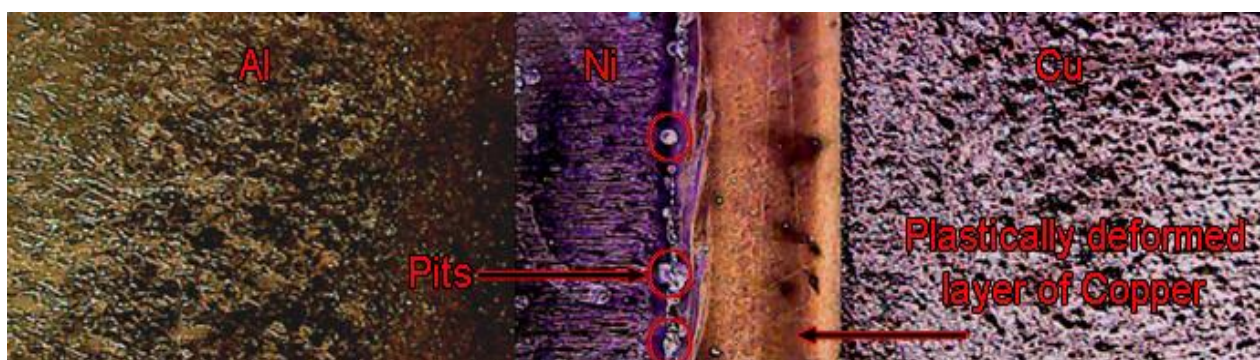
Friction welded Al-Ni-Cu (Sample 6)
